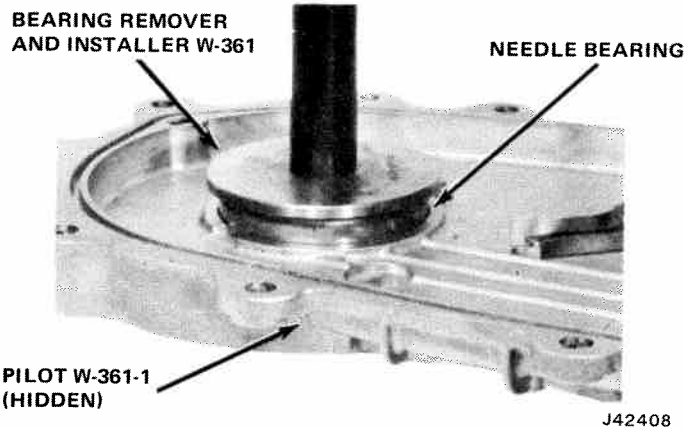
Installing Drive Sprocket Rear Needle Bearing
